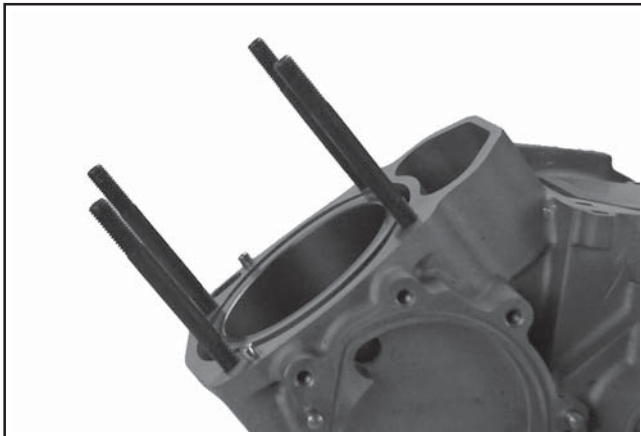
Side View of Crankcase and Studs for Height Dimension/Reference.
